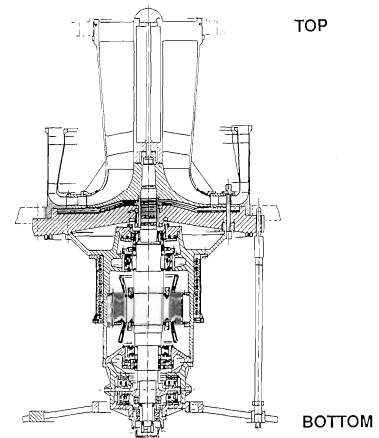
Coolant gas circulator prototype MALVE (5300 r.p.m, overhung impeller wheel, 1,25 m diameter, rotorweight 2 t, power input 400 kW)
